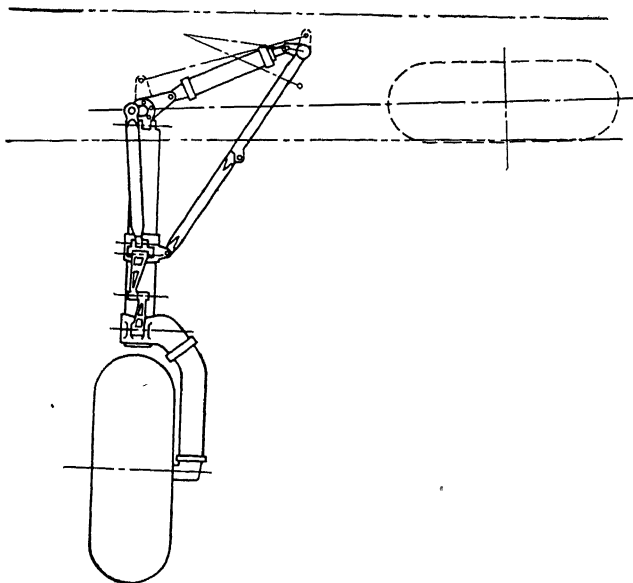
Typical main landing-gear assembly. Designed for retraction into the wing.
